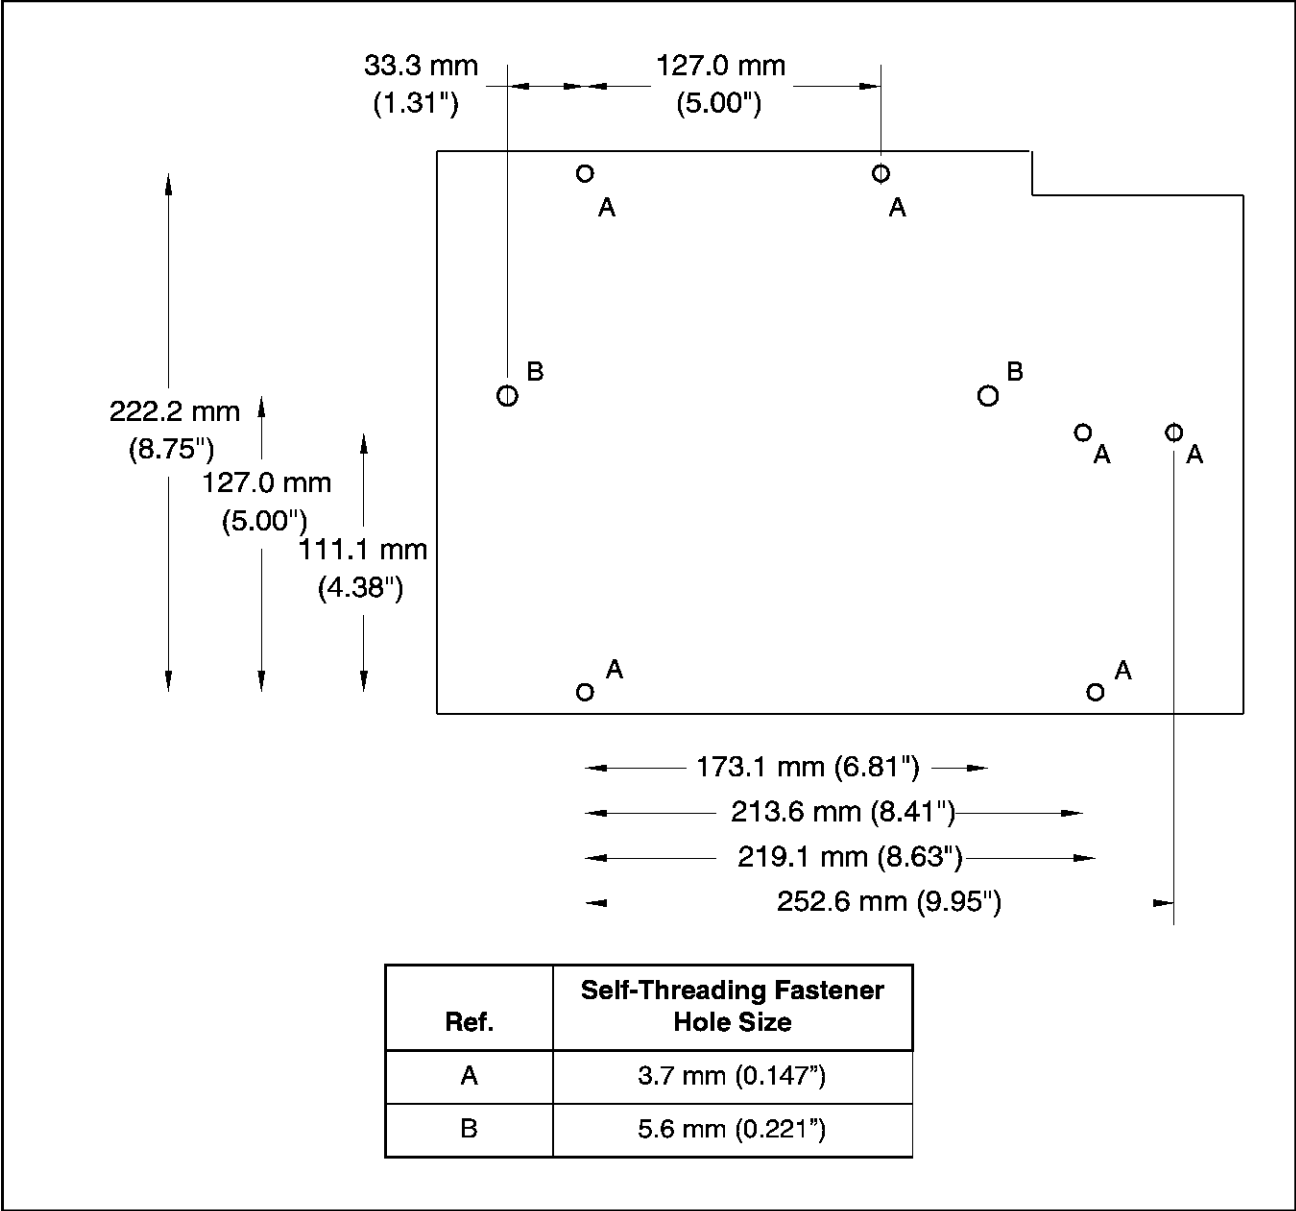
Mounting Dimensions for the AC Line Filter Kit
